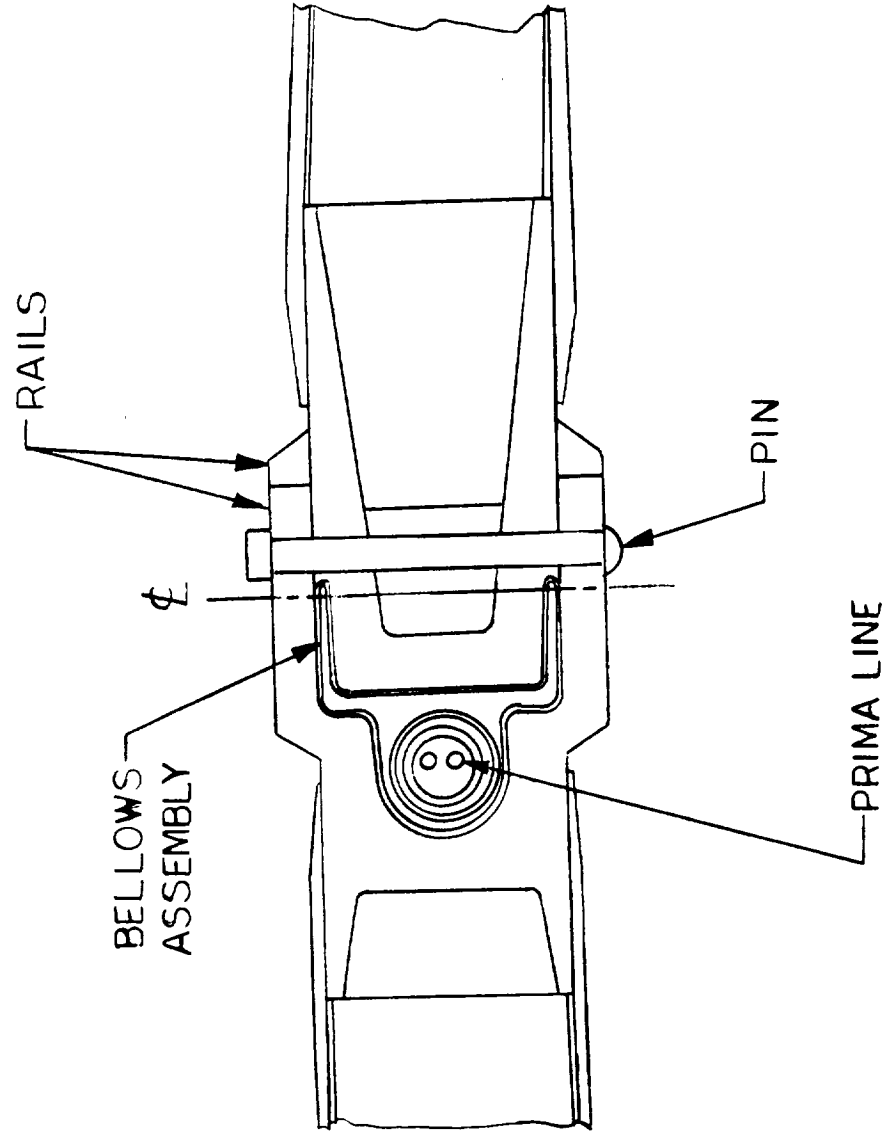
Standard Fairing Anti-Contamination Joint
